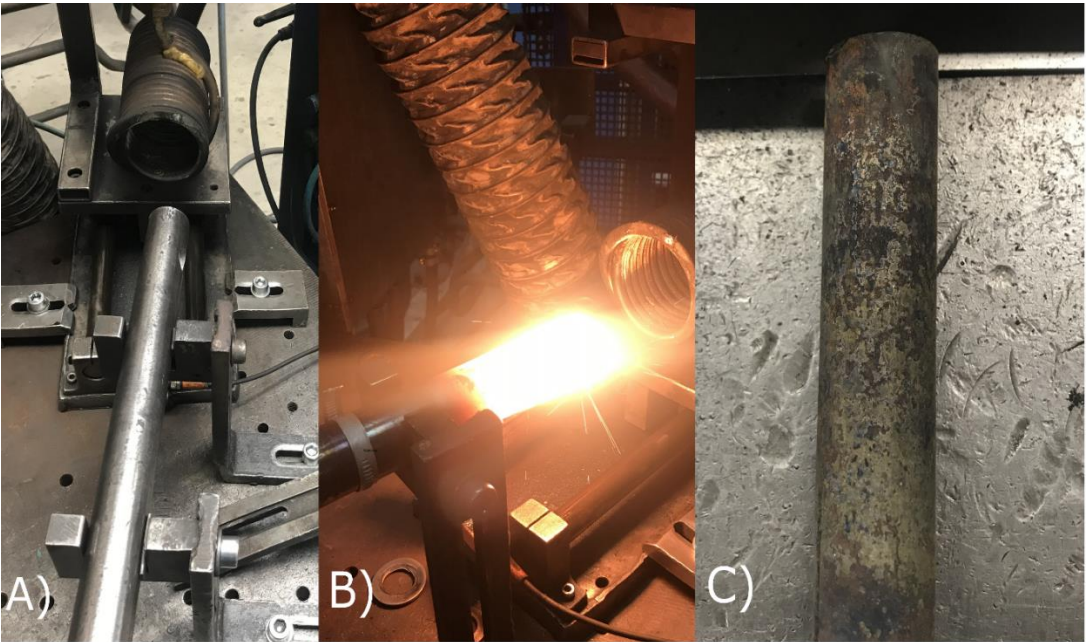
The testing process: A) Clean rod B) Heated rod D) Used rod
